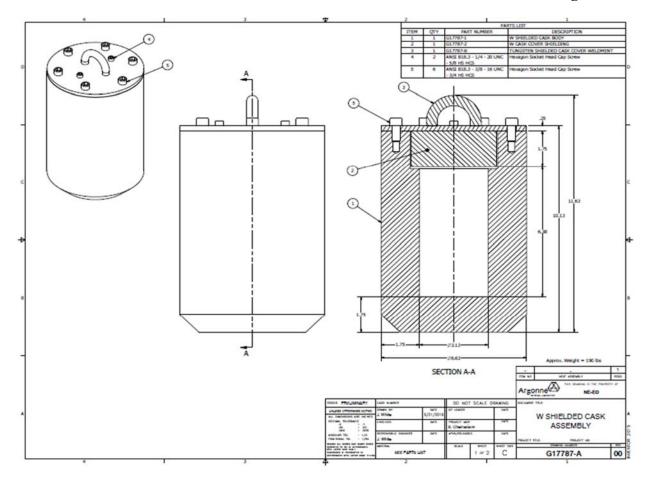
Tungsten Shielded Cask Assembly (WSCA)
